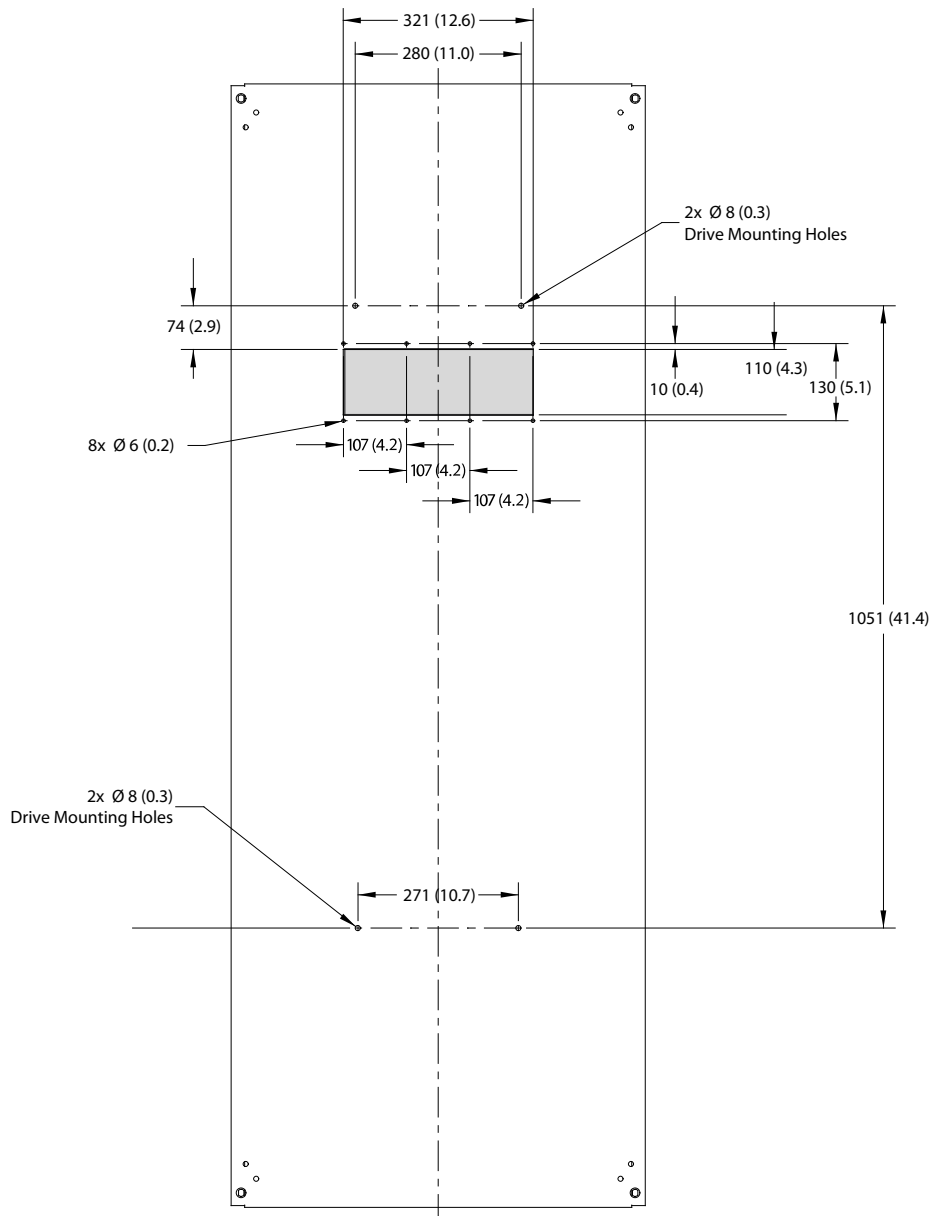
FA10 Mounting Plate Template for In-bottom/Out-back Cooling
